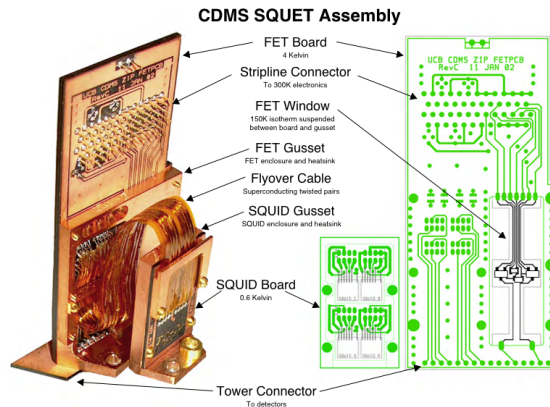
Picture and schematic layout of a SQUET card. Courtesy: Dennis Seitz.
